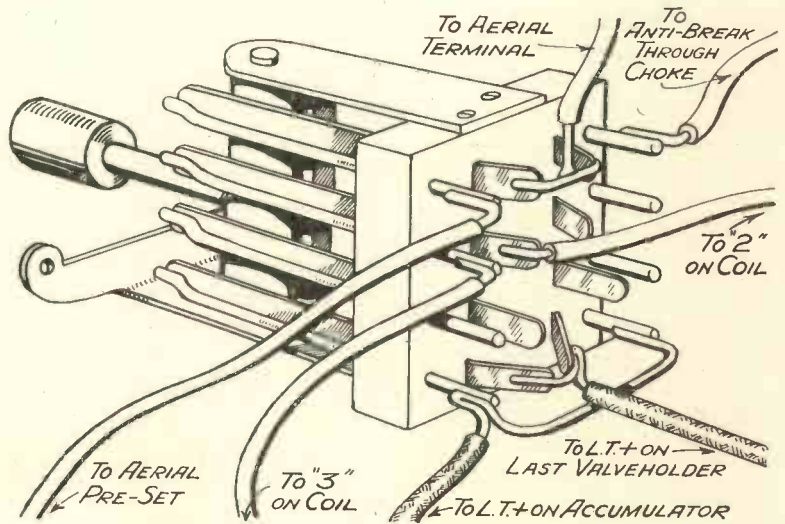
ENLARGED VIEW OF MULTI-CONTACT SWITCH WIRING.
